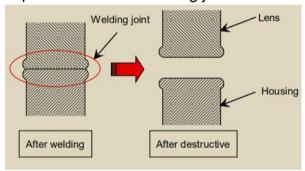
Simulation of welding condition and after destruction of welding, this is for seeing the place of breaking
